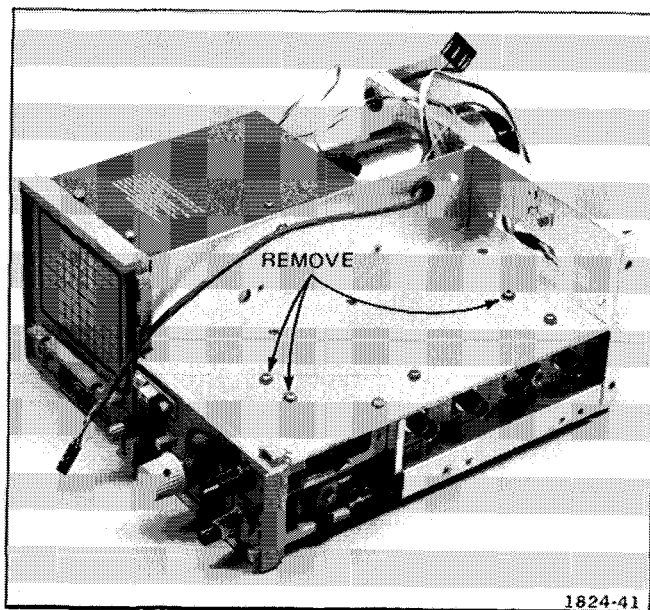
Location of screws holding Attenuator circuit board to chassis.
